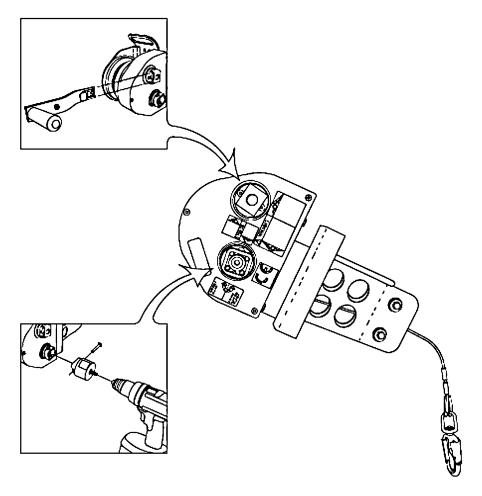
M-1. Winch Assembly with Crank Arm or Power Drill with Power Drive Overload Clutch
